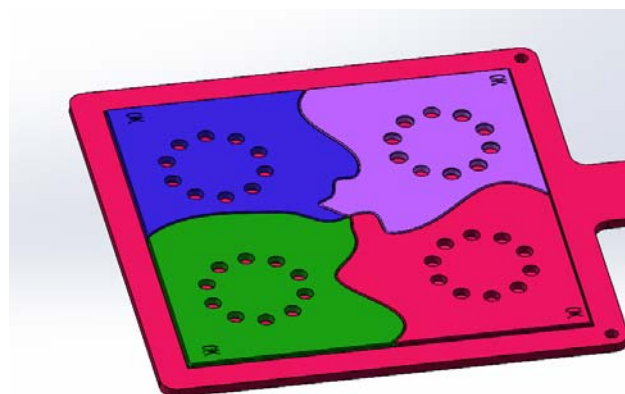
State of Workpieces (to be Assembled) on the Tray
